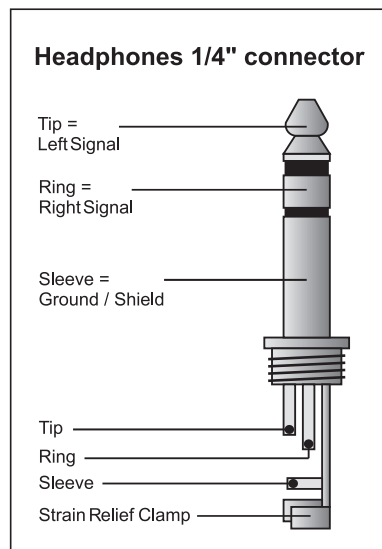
Wiring of a stereo headphones 1/4" plug
